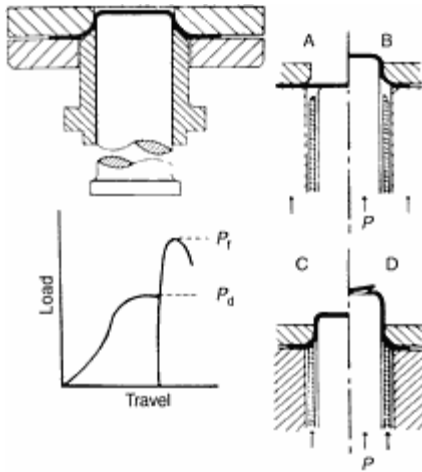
Draw fracture test. A and B: drawing. C and D: clamping and fracture
